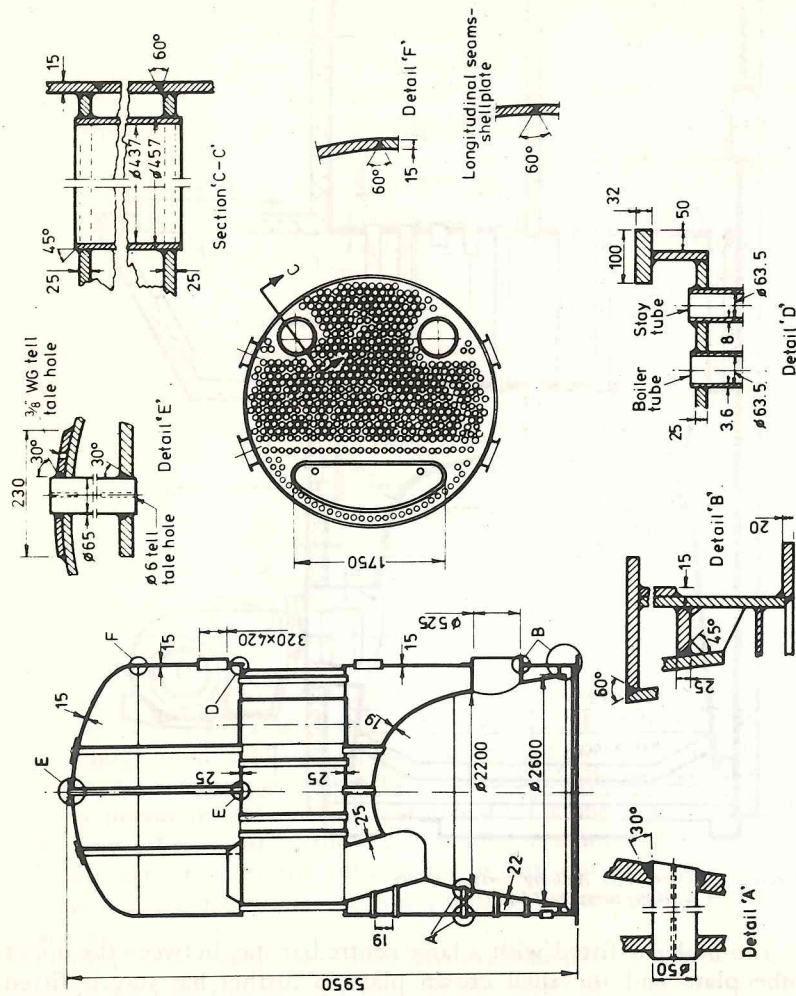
Plan and section views of the Aalborg AQ3 boiler
